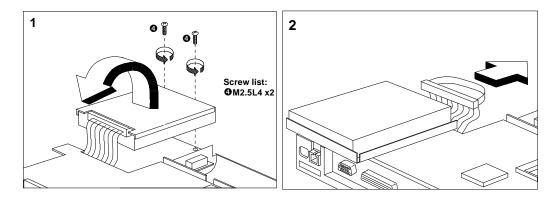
Removing the Hard Disk Drive Bay Cover
